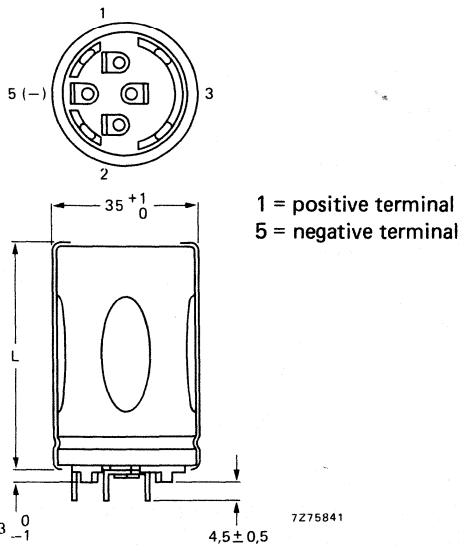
Capacitor with printed wiring pins; see Table 5 for dimension L.
